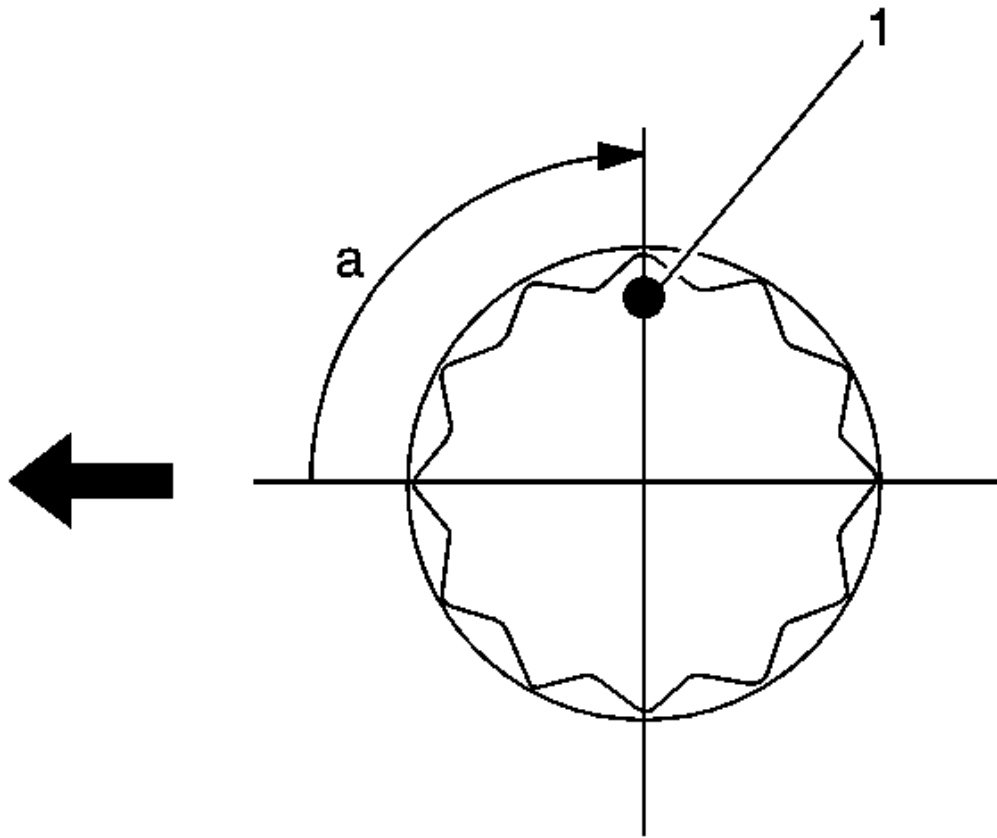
Identifying Crankshaft Bearing Cap Tightening Final Step
